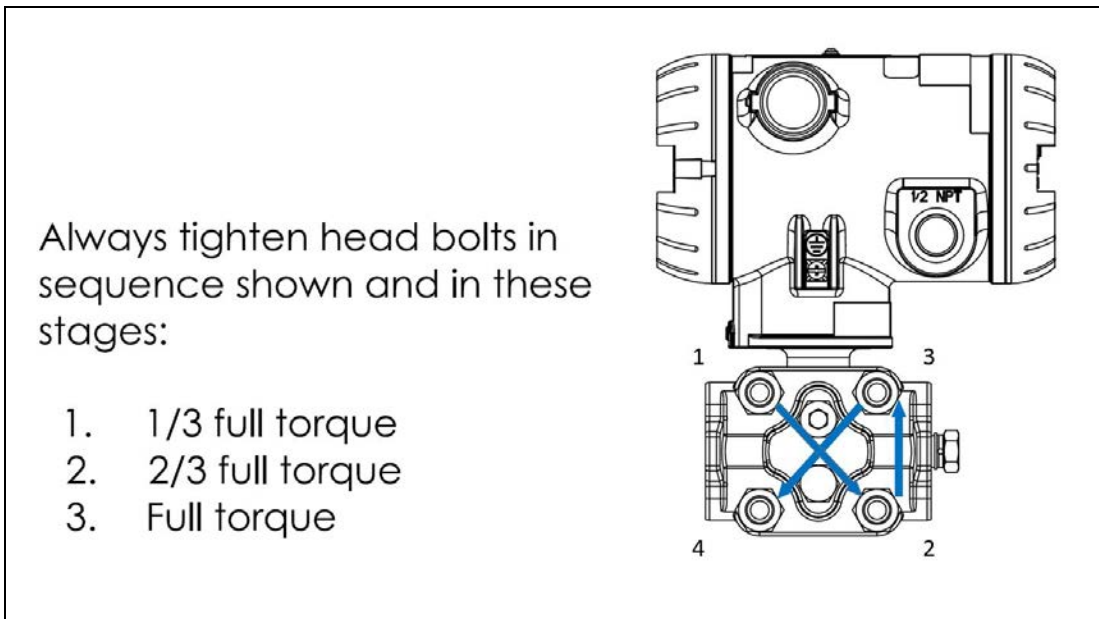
STW Standard Transmitter - Head Bolt Tightening Sequence
